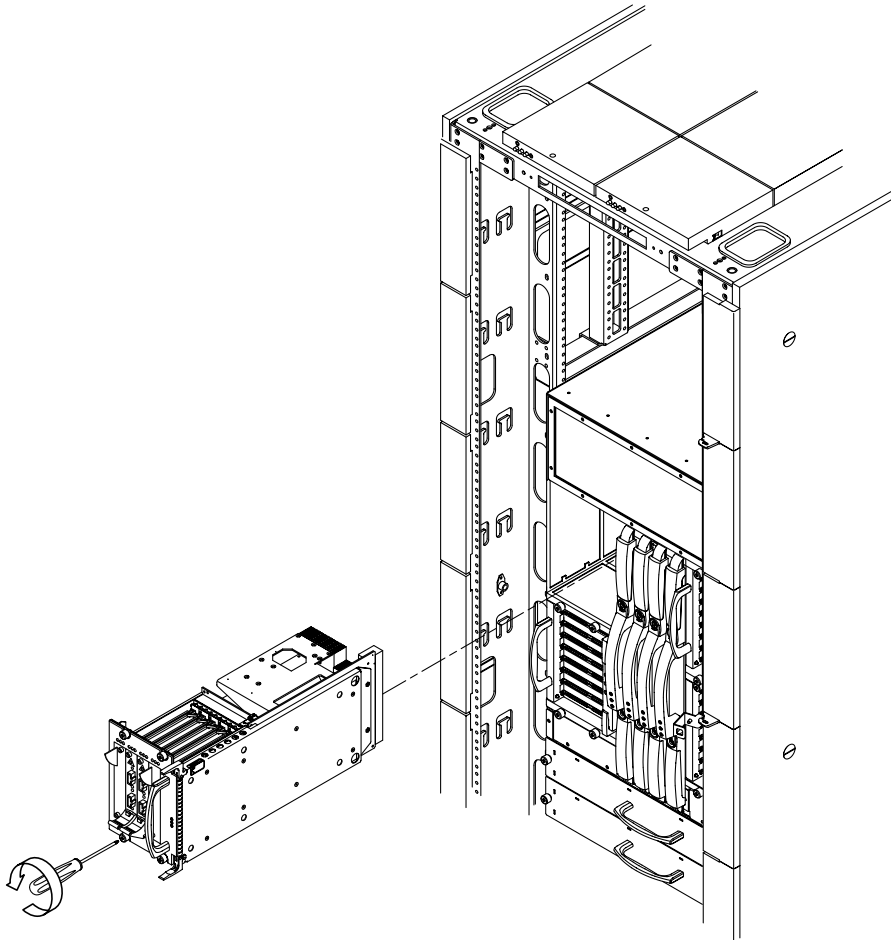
Replacing a Sun Fire Link Assembly From a Sun Fire 6800 System
